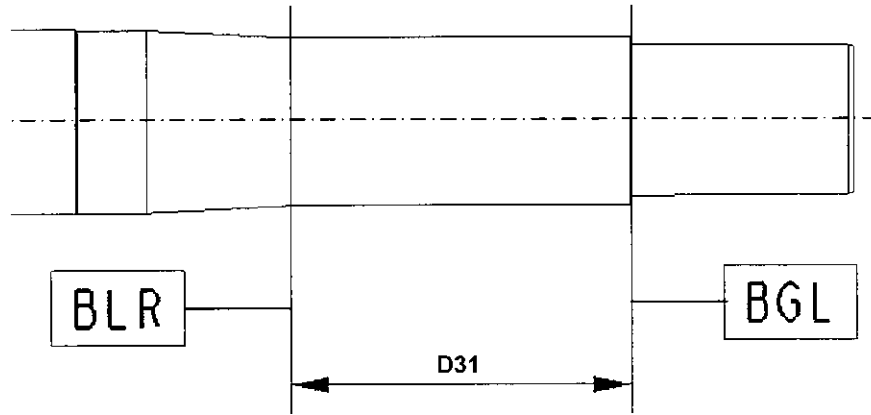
Relation for Bearing Assembly Length of Drive Shaft
